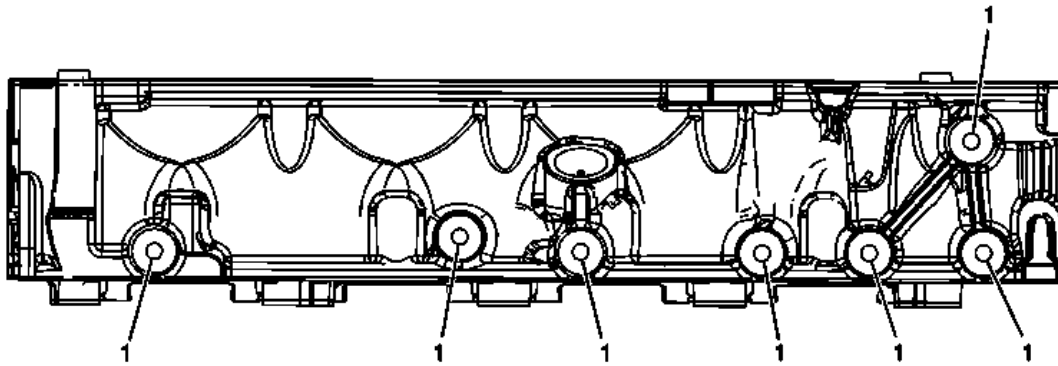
Identifying Bolt Size & Locations On Lower Crankcase - Right
